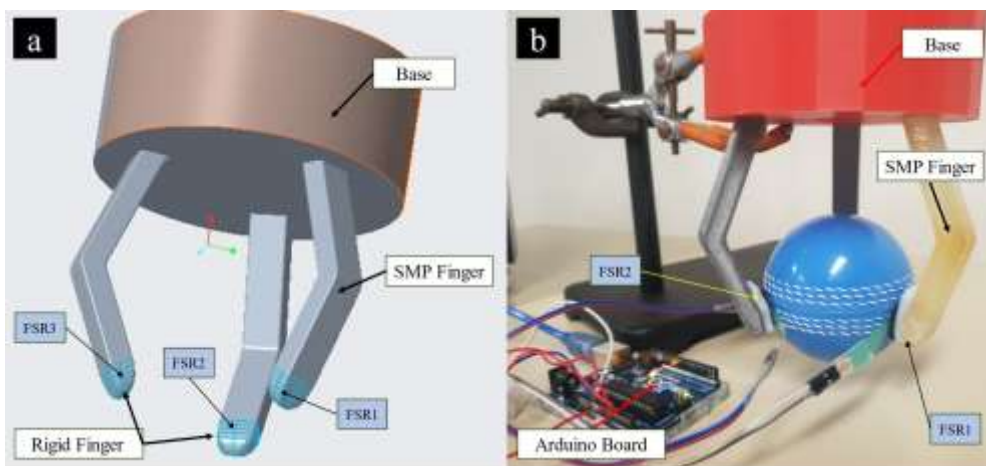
(a) 3D gripper Assembly model and (b) Actual gripper assembly.
